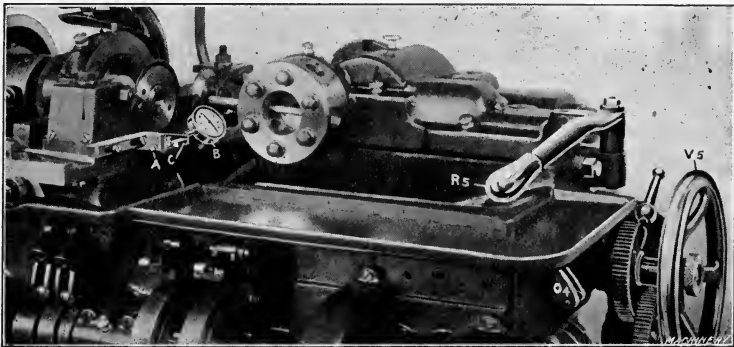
Testing Position of Raising Block by means of Dial Indicator
